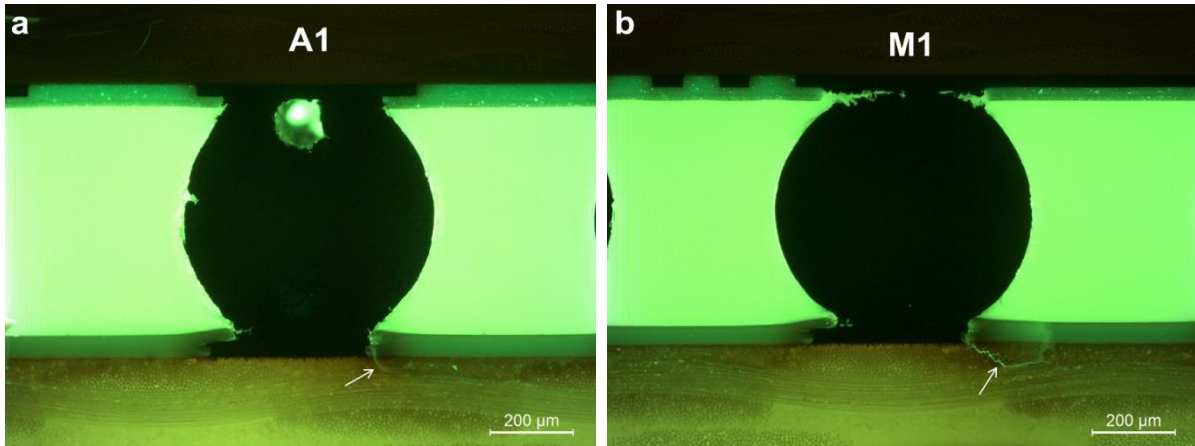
Cross-sections of solder joints a) A1 and b) M1 in the outer row of solder joints to a BGA676 with SnPb solder joints showing cracks in the PCB.
